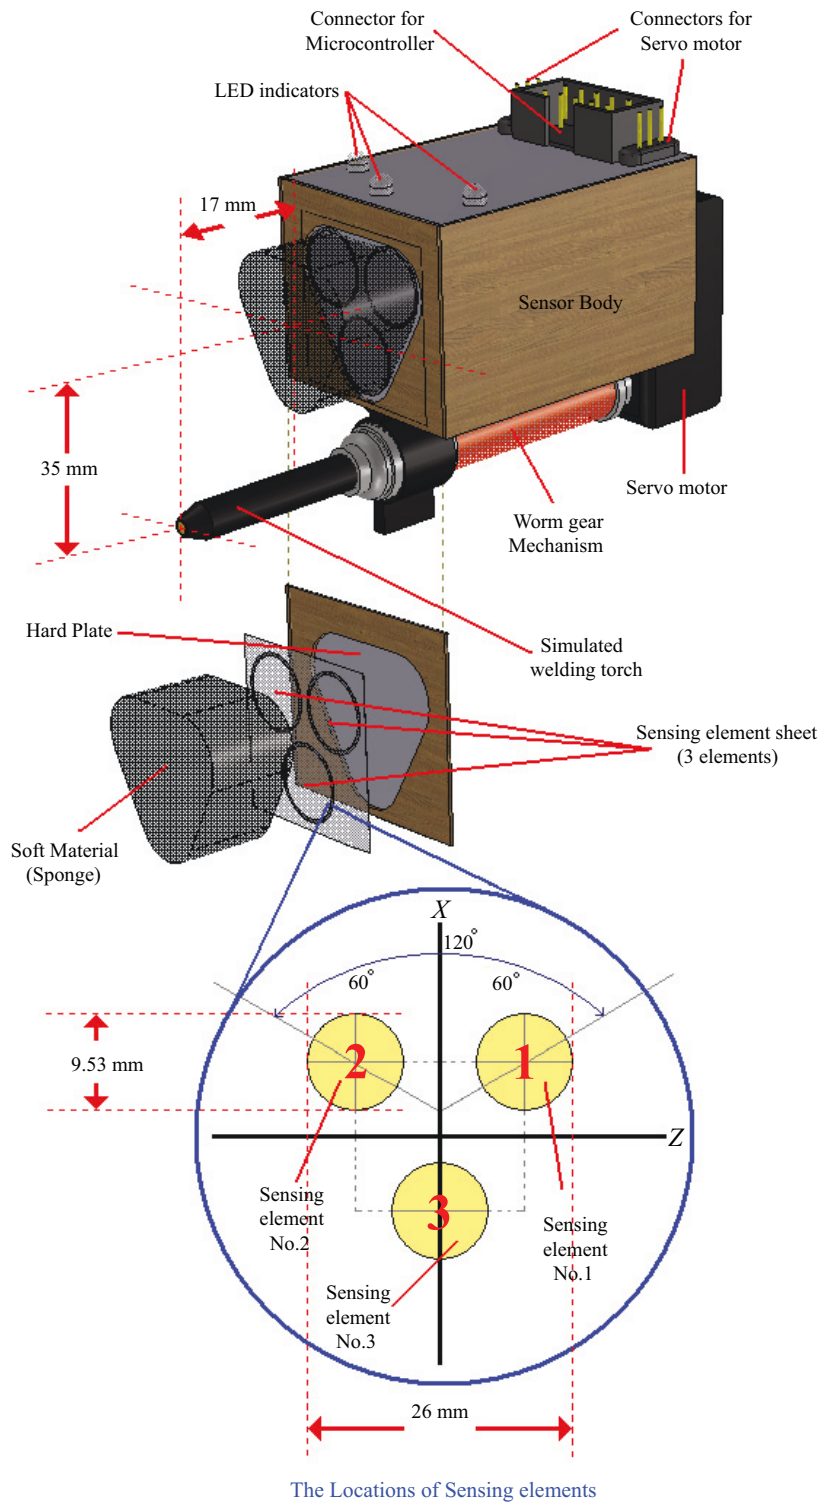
Design concept of prototype tactile sensor hand for welding arm robot
